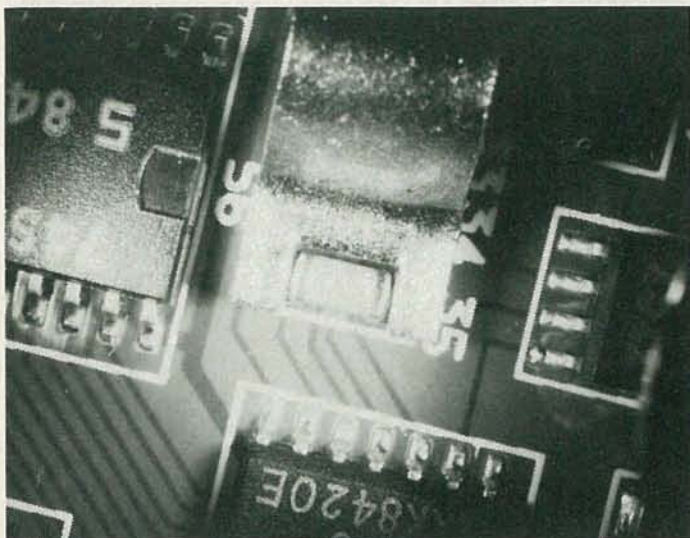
A U-SHAPED SOLDERING IRON tip can be used for soldering and desoldering chip resistors and capacitors.
